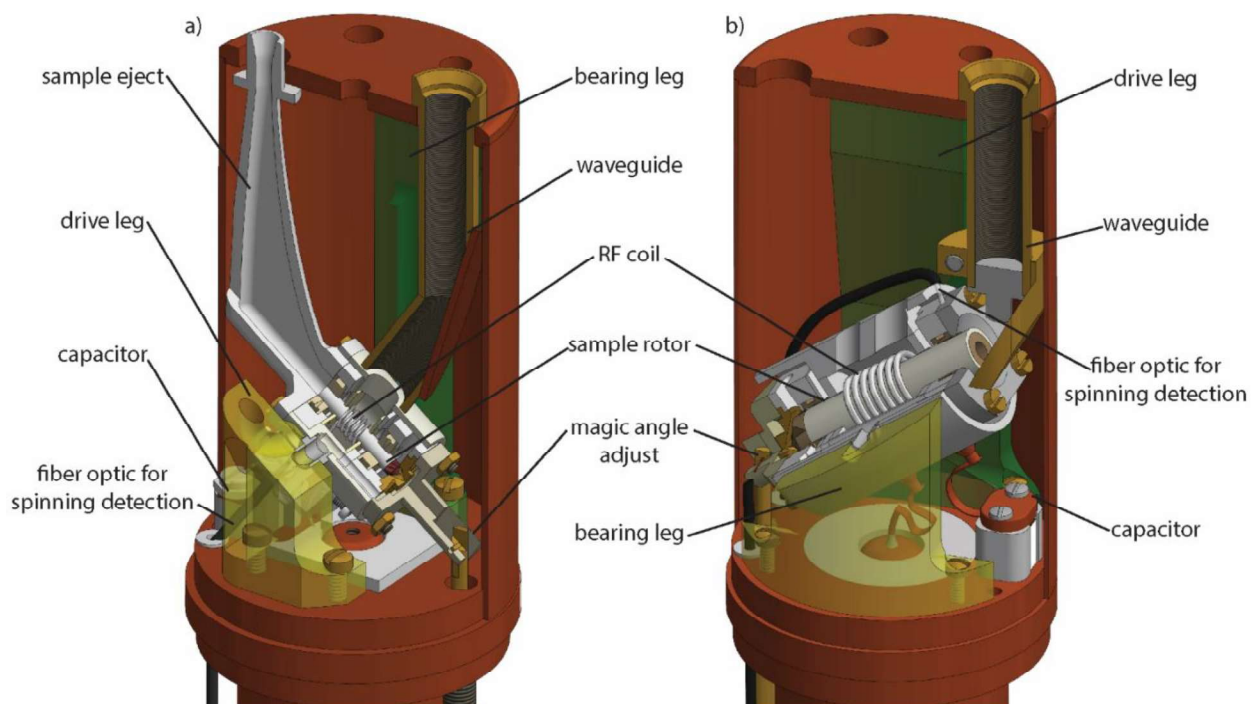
CAD detail view of probehead for a) 3.2 mm OD rotor and b) 9.5 mm OD rotor.
